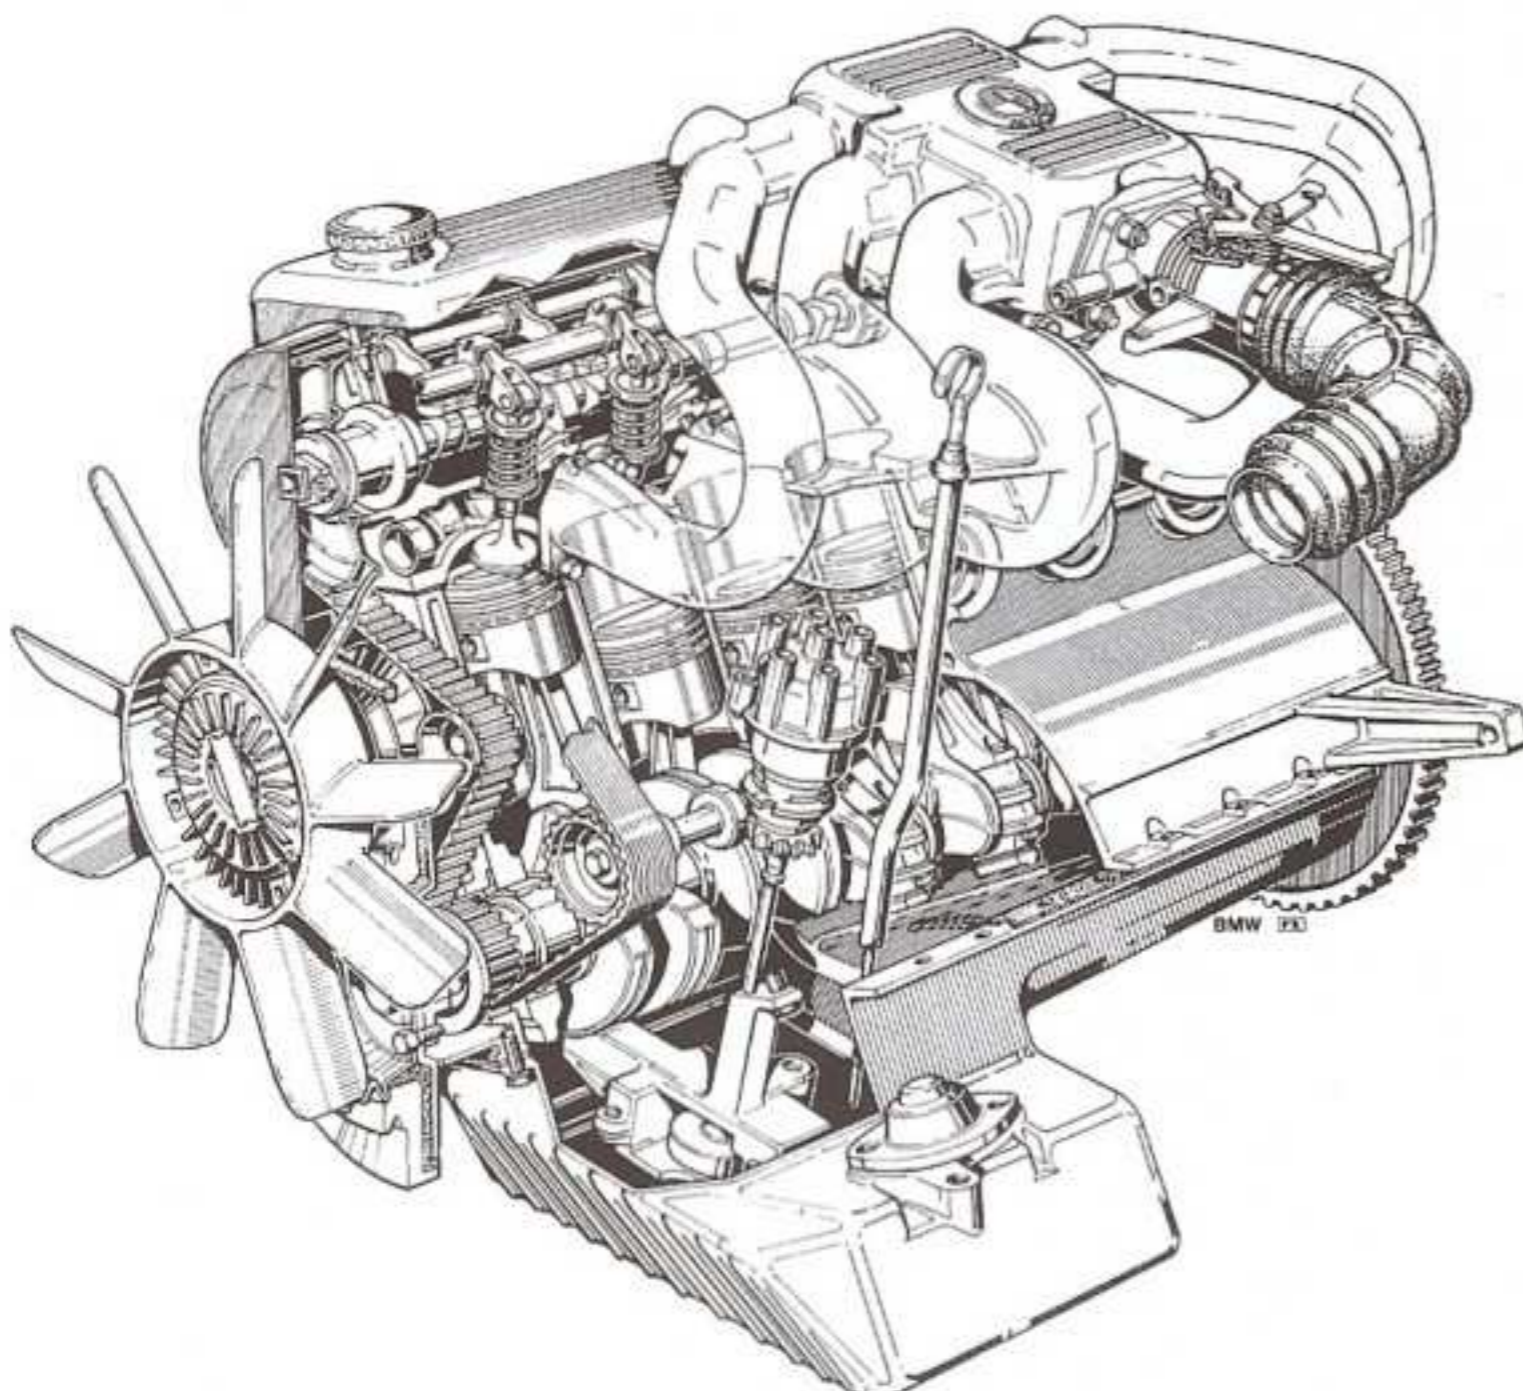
Cross section of BMW 320i six-cylinder engine with L-Jetronic fuel injection
